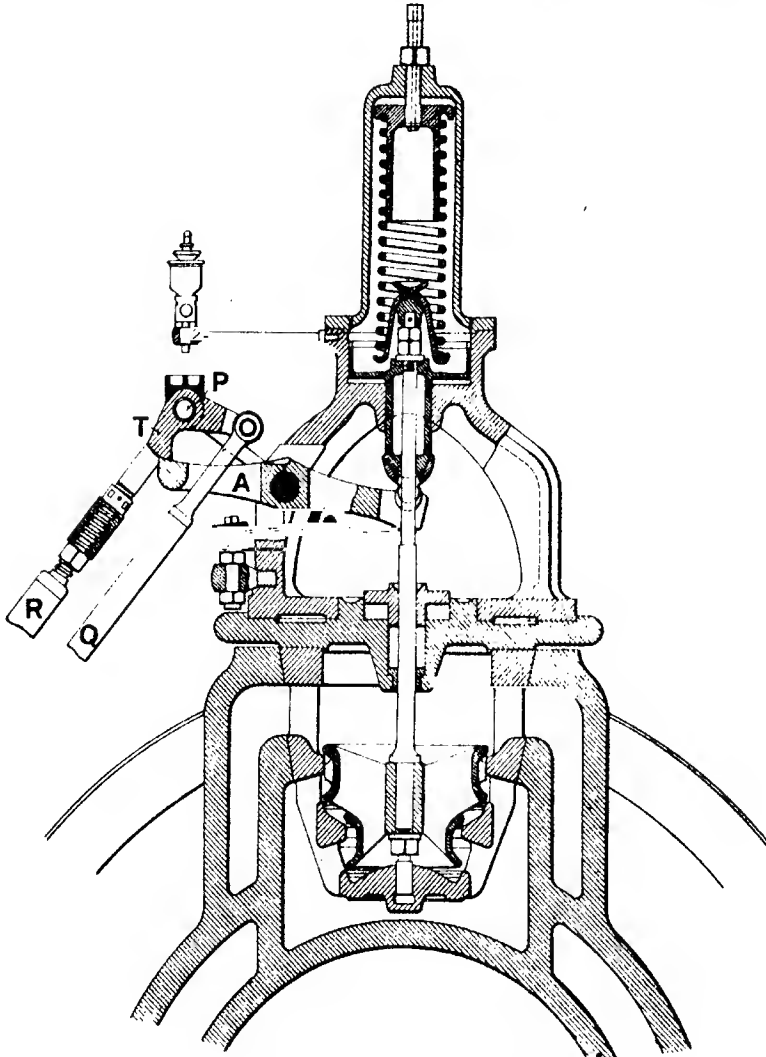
Four-seated valve and trigger. Sulzer engine.
